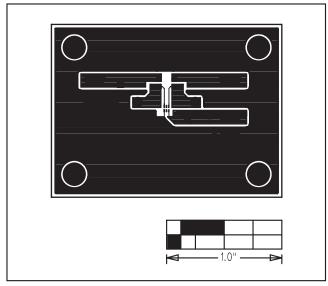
MAX9610 EV Kit PCB Layout—Component Side
